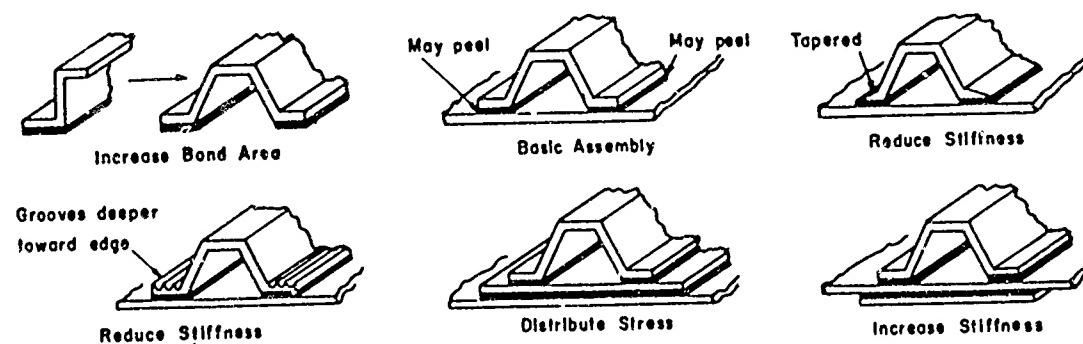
JOINT DESIGNS FOR HAT-SECTION SKIN-AND-STRINGER CONSTRUCTION (REF. 19)
